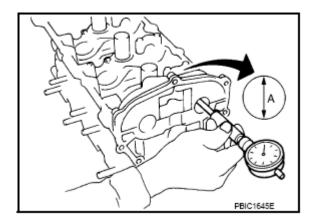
Measuring Inner Diameter Of VVEL Ladder Assembly Using Bore Gauge Courtesy of NISSAN NORTH AMERICA, INC.
